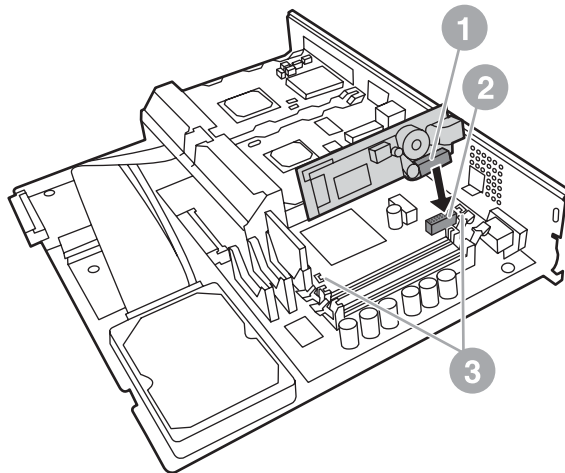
Installing the fax card on the HP LaserJet 9040/9050mfp formatter board
